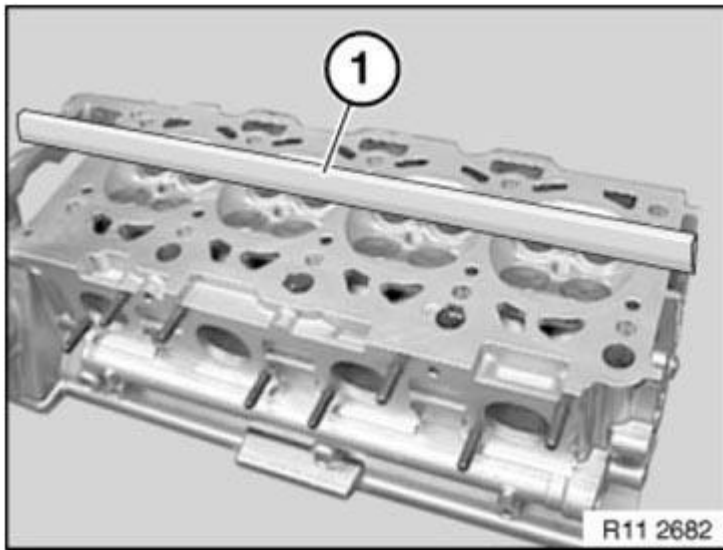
Checking Evenness Of Cylinder Head Lower Face With Standard Straightedge - Longitudinal
